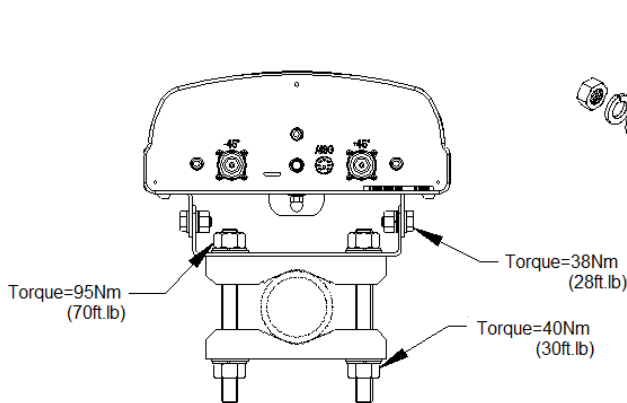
Fixed Downtilt Mounting Bracket Assembled to Antenna
